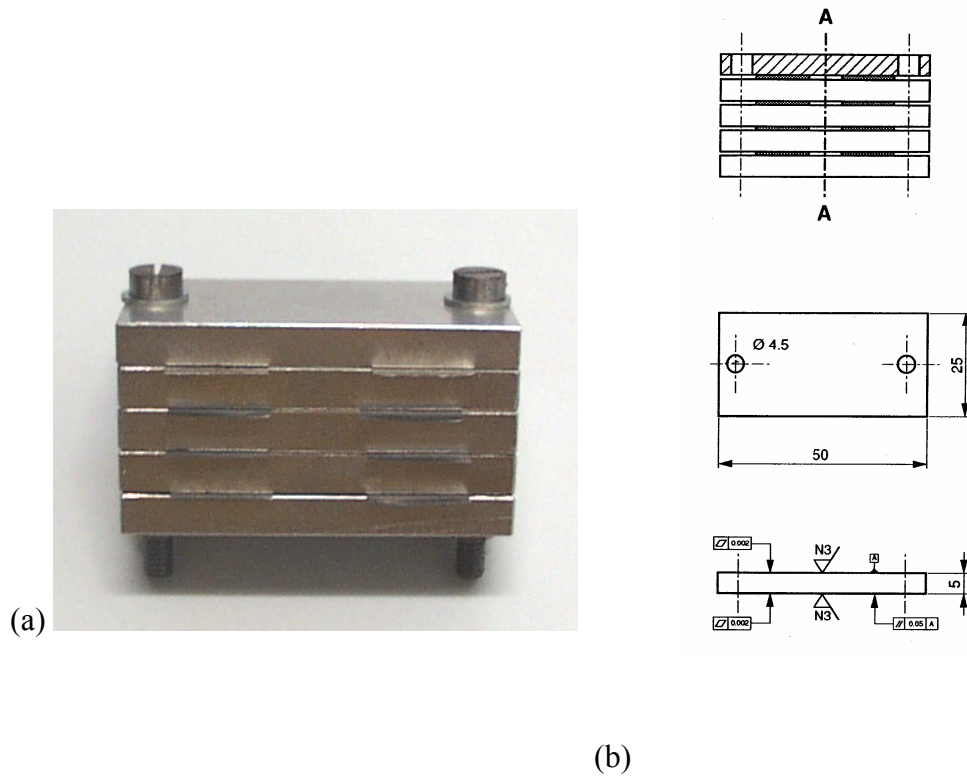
Object simulating cracks (a) and its drawing (b).
